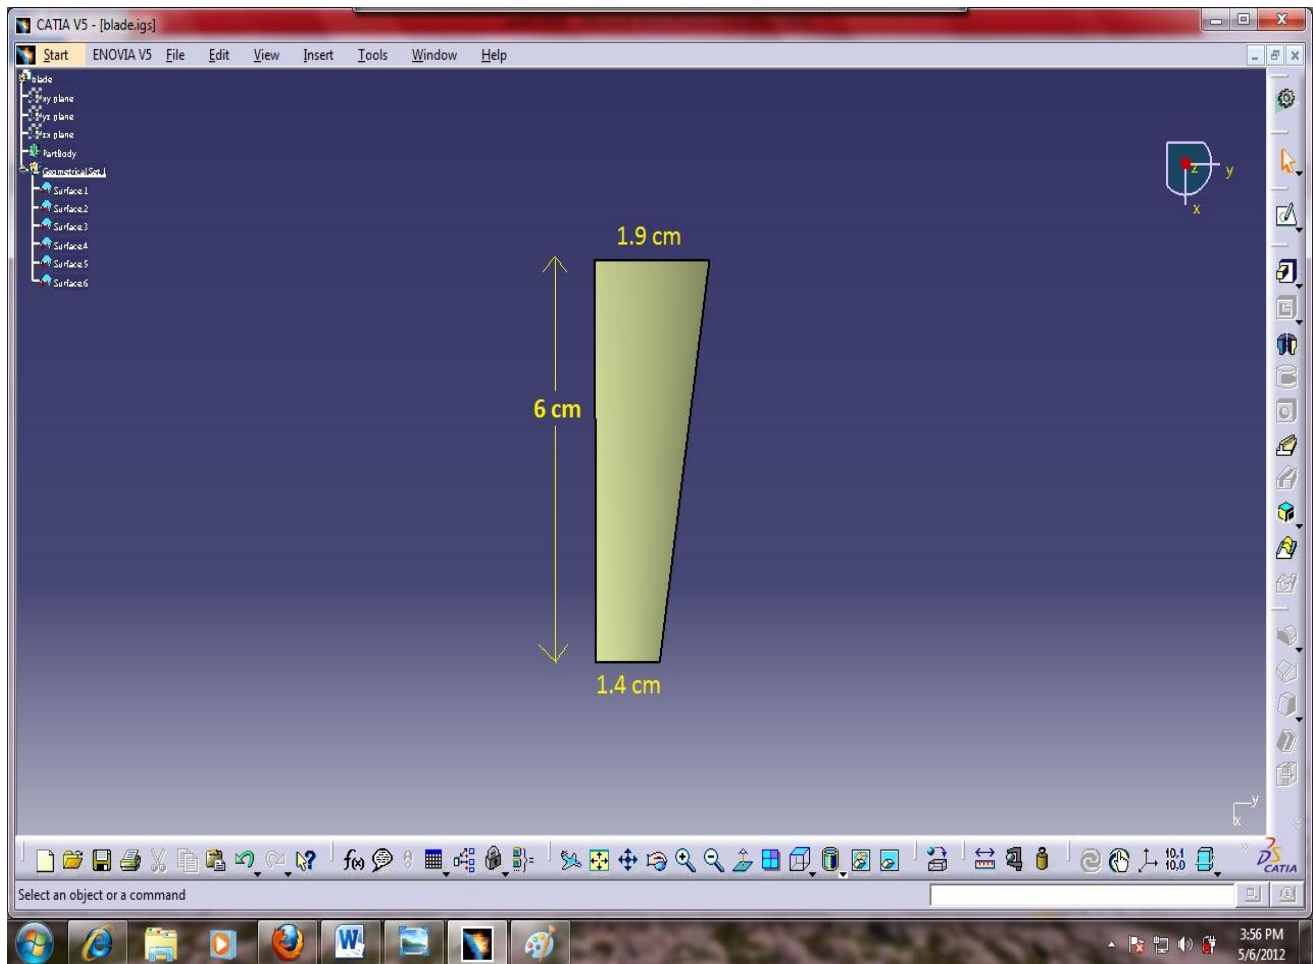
Top view of the upper as well as the lower rotor blade along with the dimensions.
